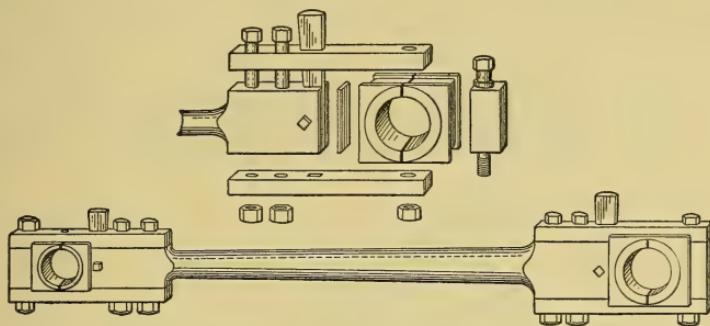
Connecting Rod with Bolted Strap Ends; May be Used with Center or Side Crank Constructions.
